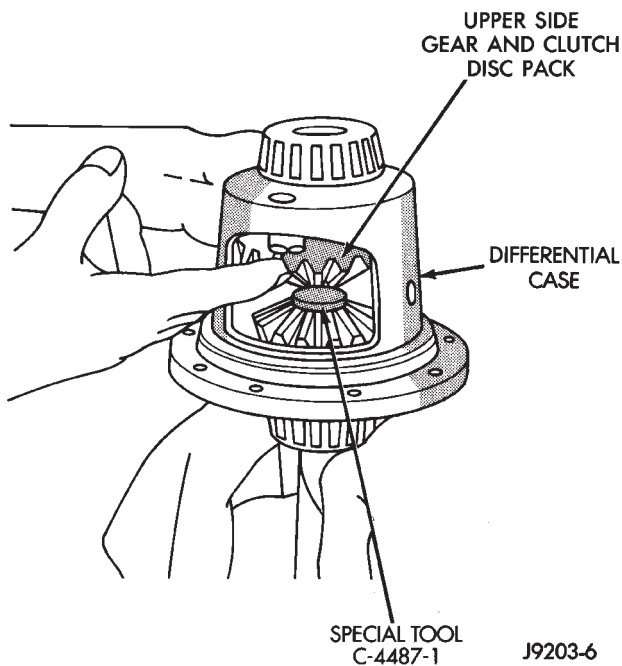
Upper Side Gear & Clutch Disc Pack Installation
